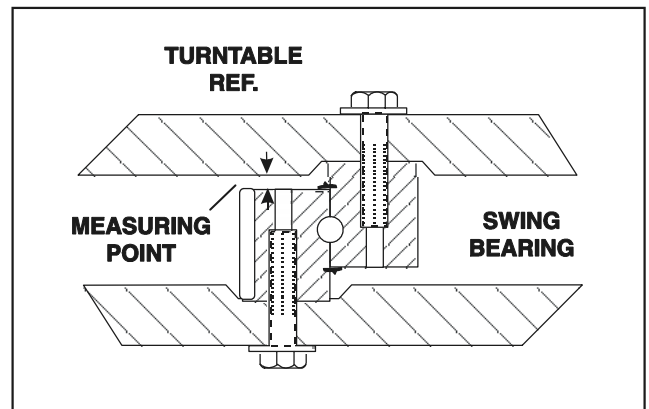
Swing Bearing Tolerance Measuring Point
